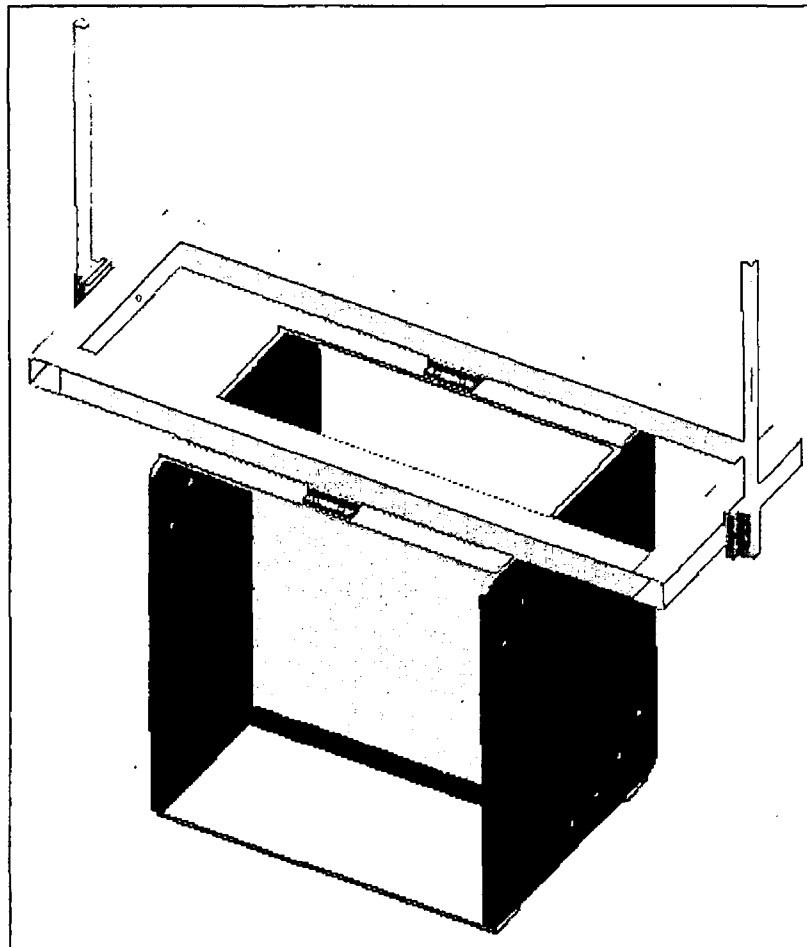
Rails and clamp assembly for moving the test plate in the x-y plane
